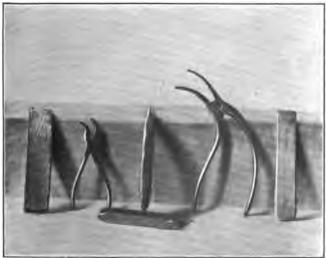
Spinners' Pliers which are used for turning the Edge of the Metal when making a Large Bend
